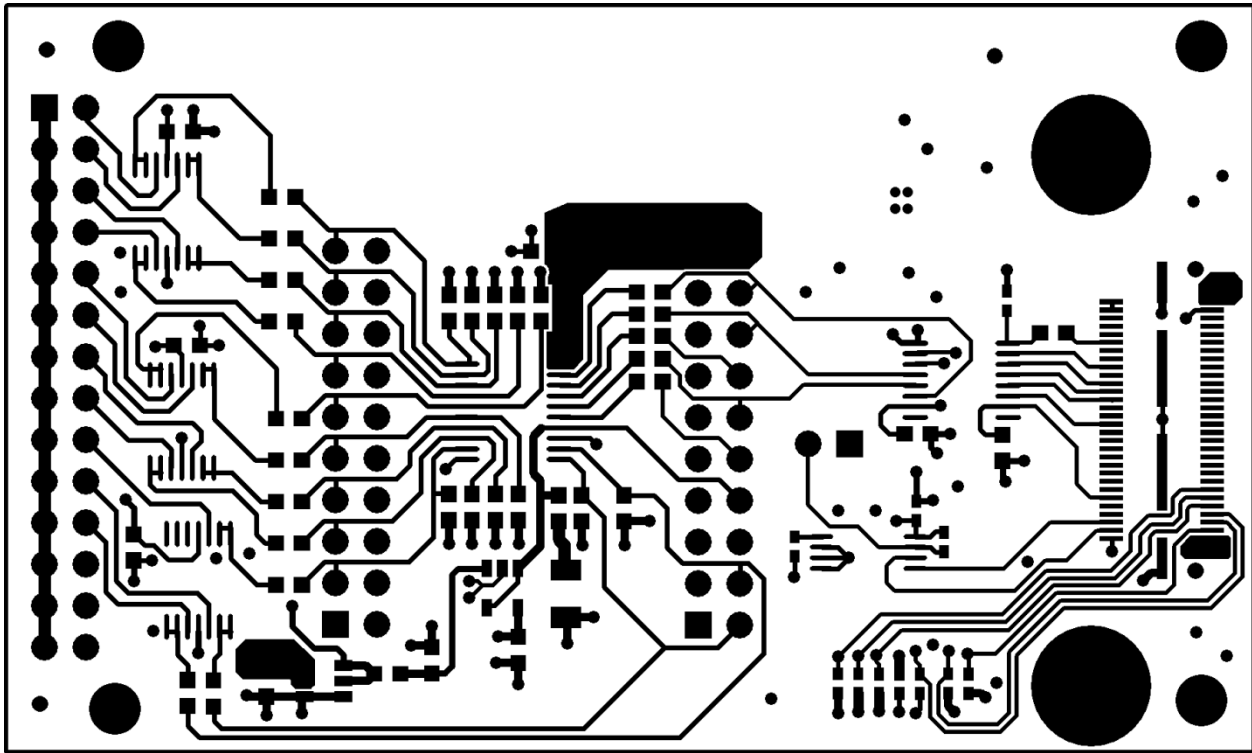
TLV2553EVM PCB Layer 1: Top Layer
